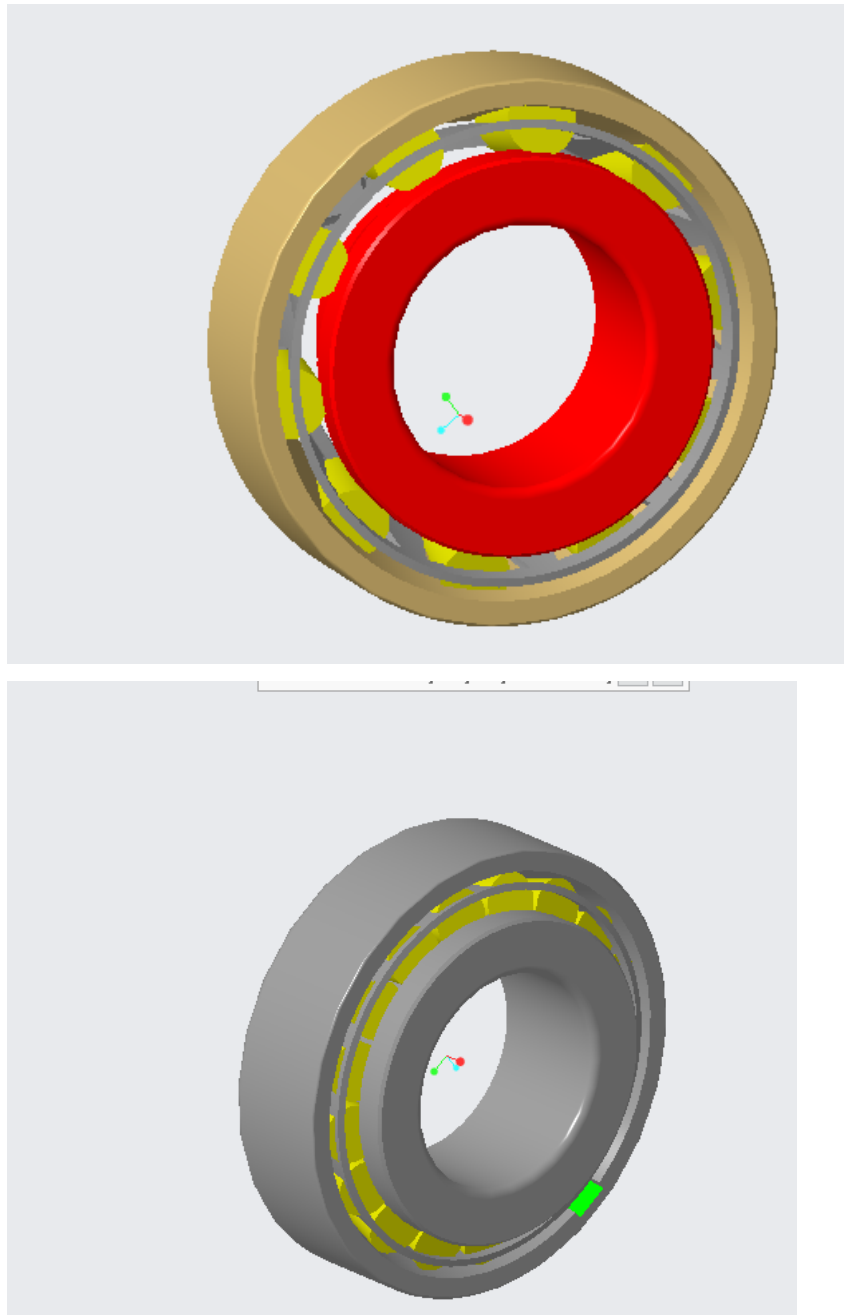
15 Assembled view of taper roller bearing with outer race defect.(NBC 30205)
